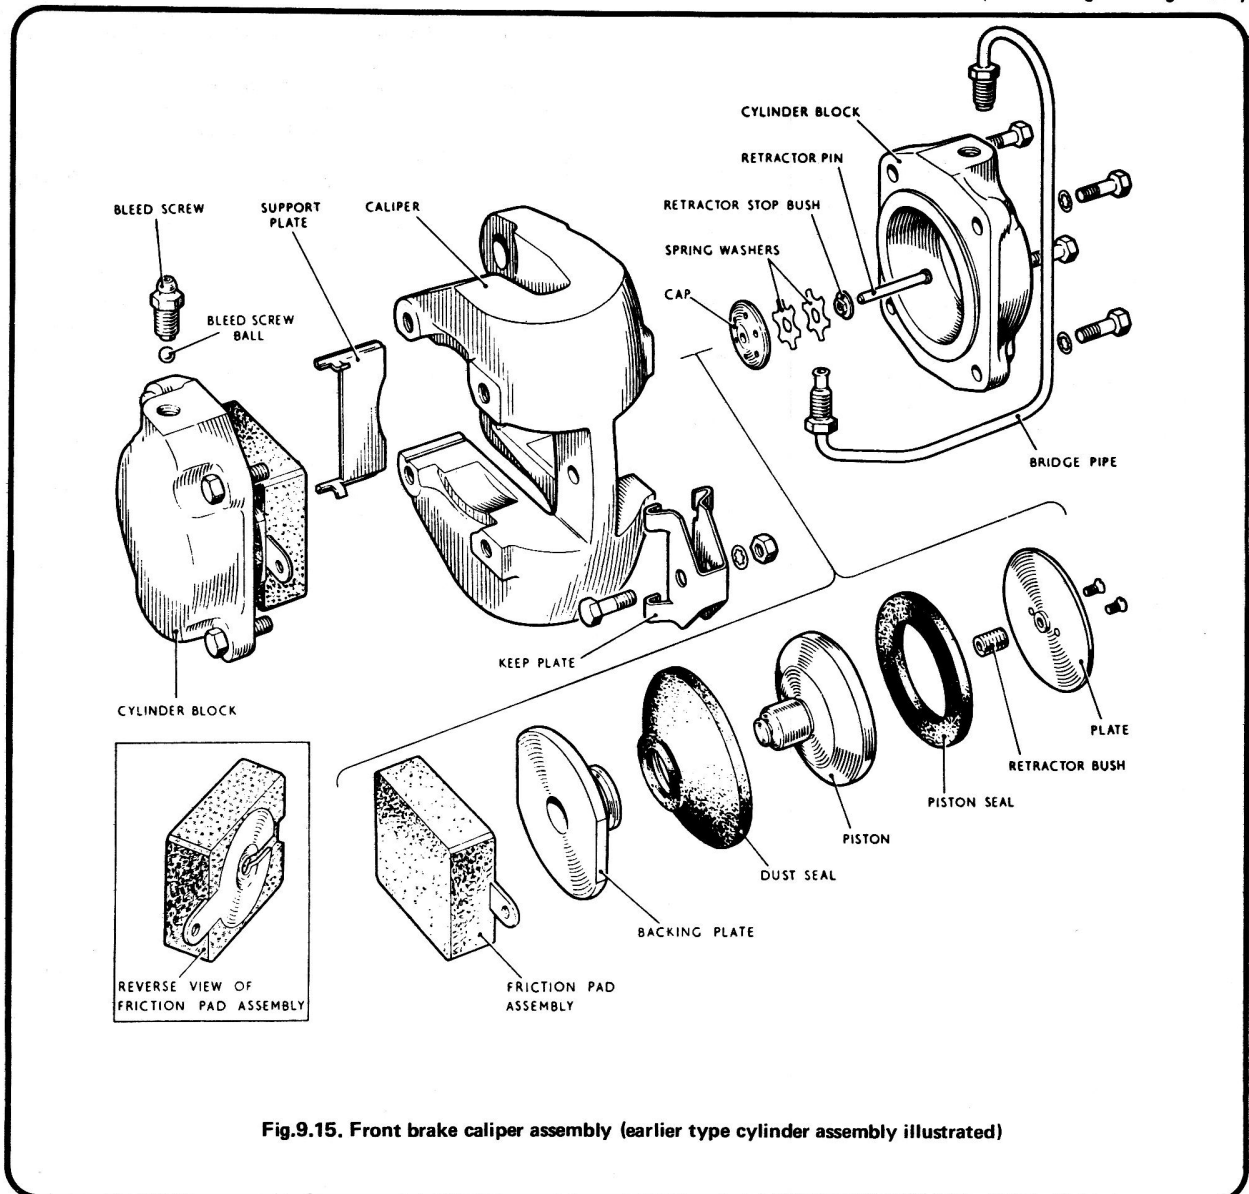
Front brake caliper assembly (earlier type cylinder assembly illustrated)
